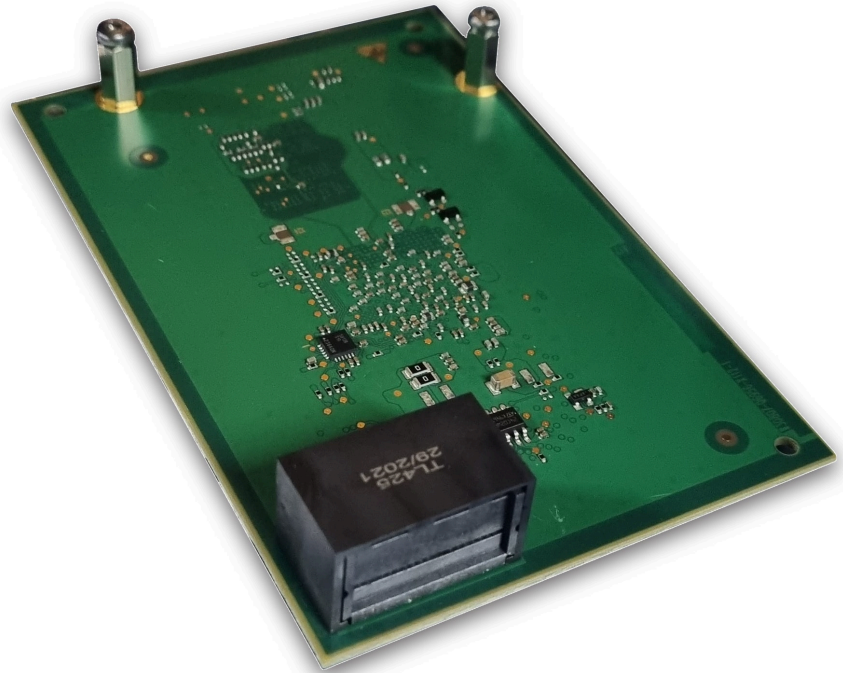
Example OCCBL – Rear side with inserted spacing bolts
